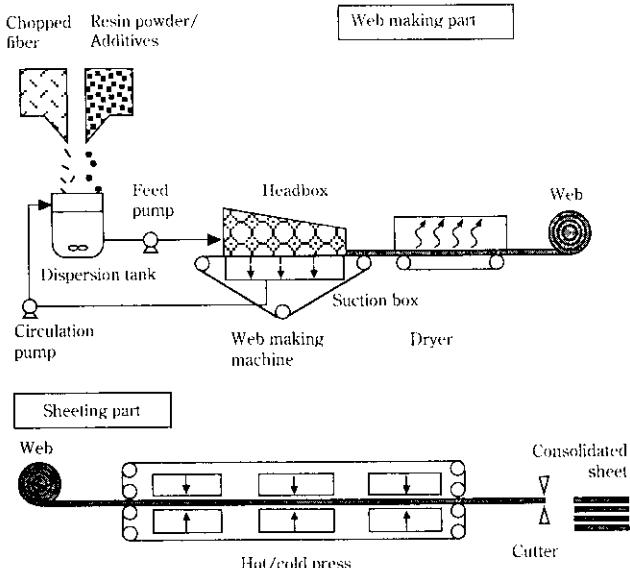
Schematic illustration of the manufacturing process of stampable sheet with paper making method¹³⁾
